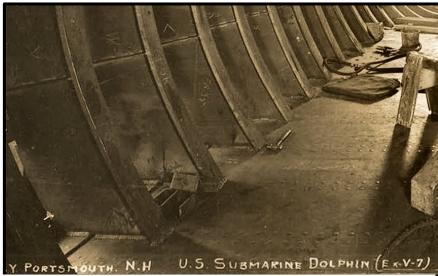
Closeup of Dolphin's forward torpedo room, clearly showing both welding and riveting. (NARA College Park photo courtesy Tracey White and Navsource.org
